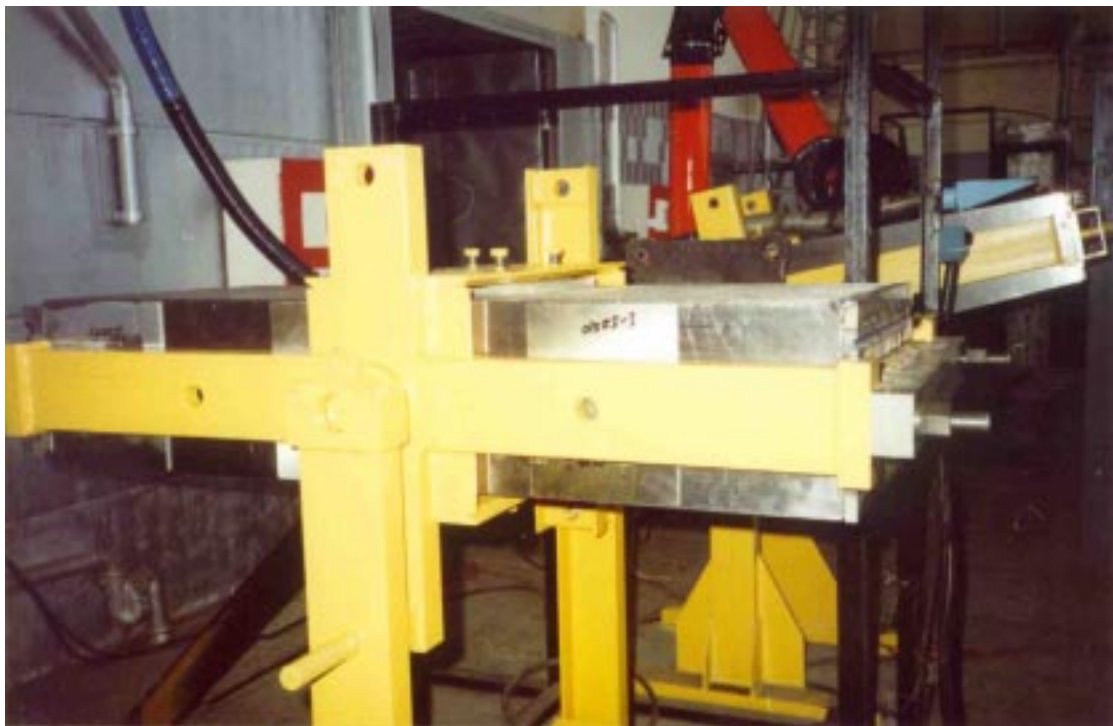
The rotating tool for sub-module final welding. To minimize the stretch of the welded bar the special procedure has been developed like a dash-line simultaneously on all bars.
